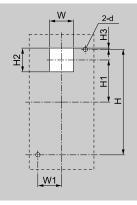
External/Face Mount Enclosure Panel Cut-Out Dimensions
